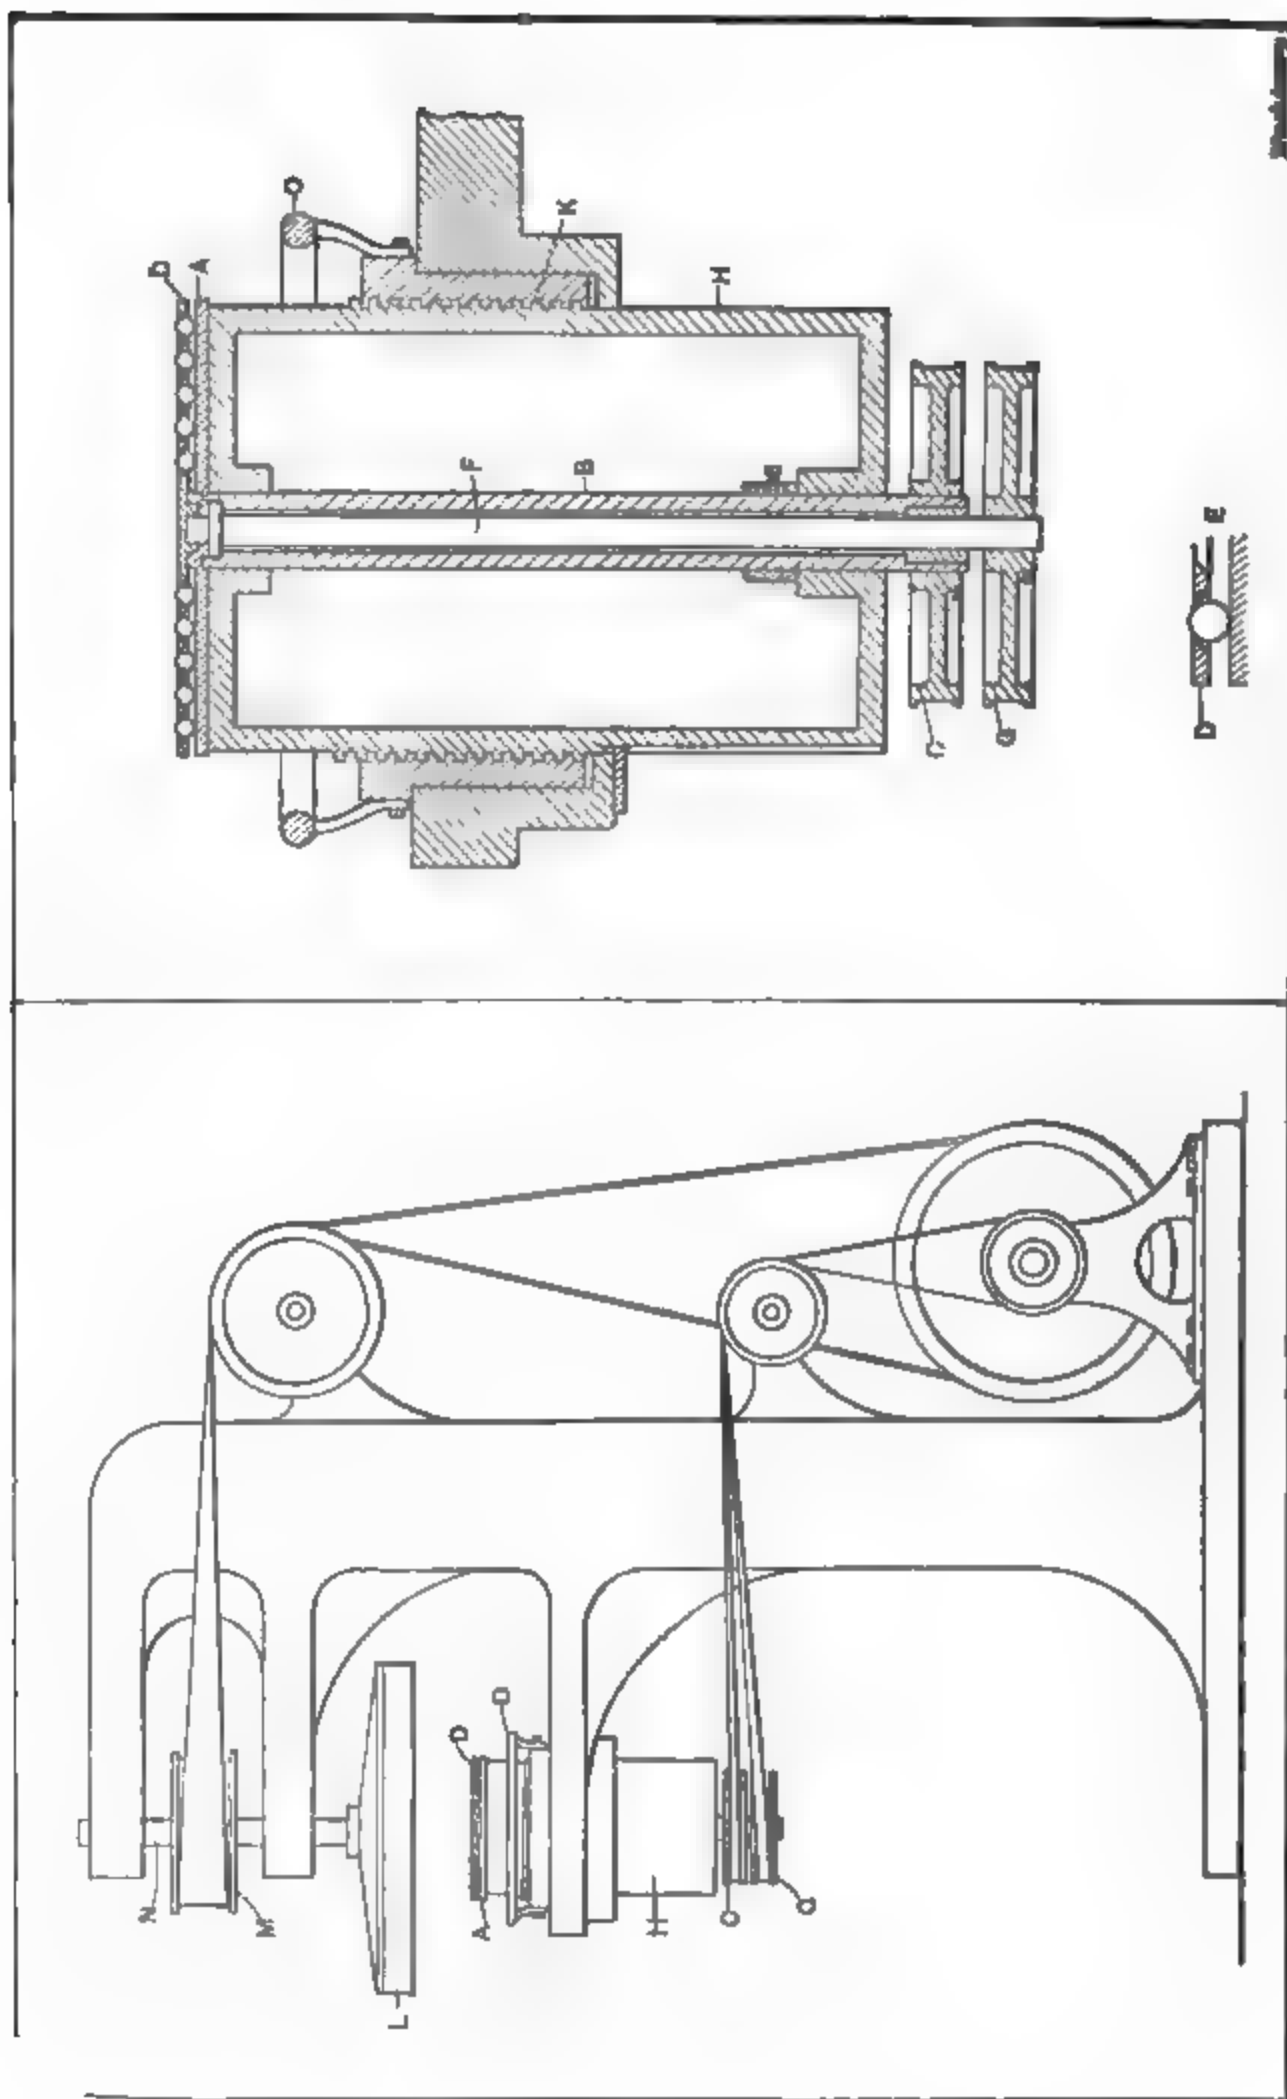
Details of Principal Parts of the Putnam Grinding Machine
